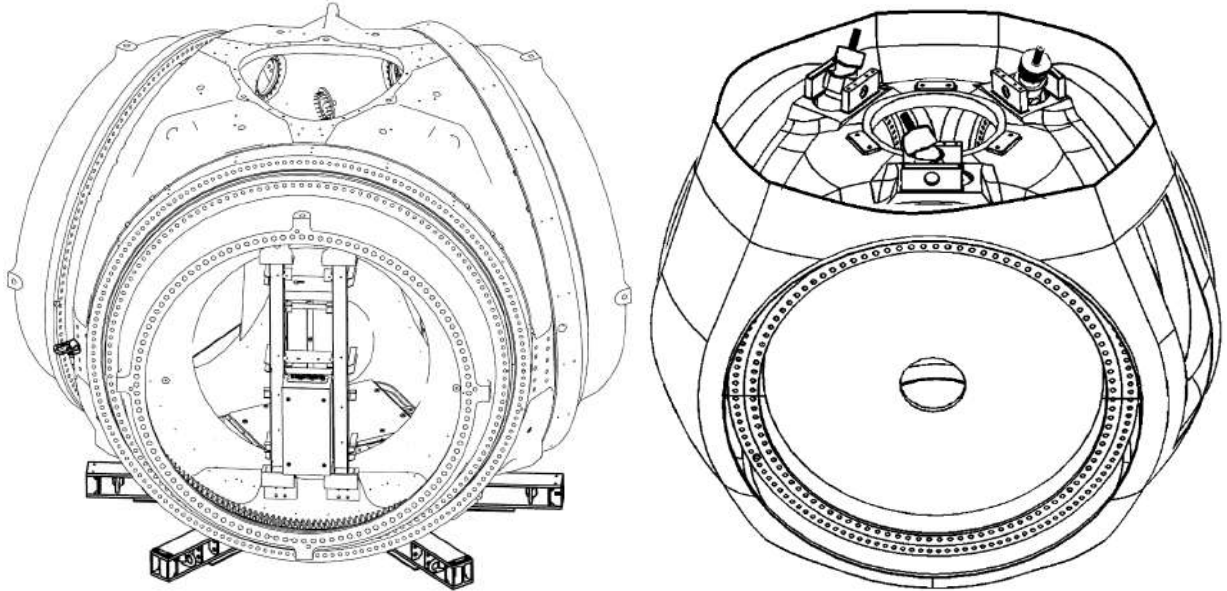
Assembled N133/N149 (left) & N155 (right) rotor hub on transport frame.
